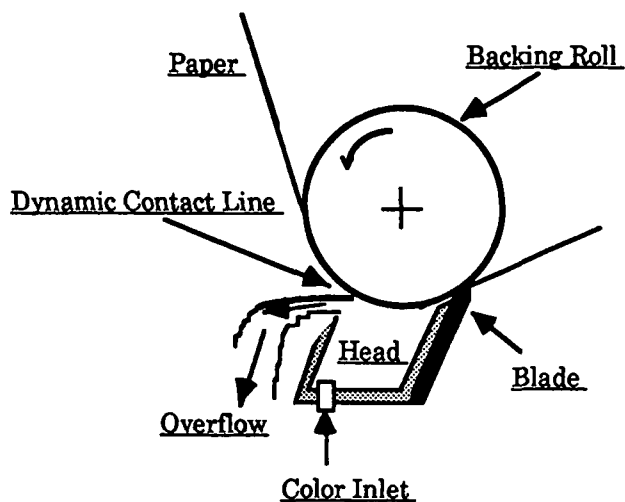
Short-dwell coating head with location of DCL at intersection of paper, color, air interface. The size of the coating head has been enlarged to show details of DCL.
